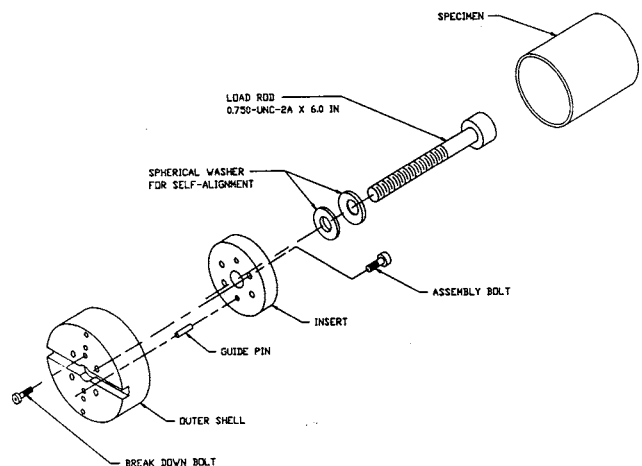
Assembly Drawing for Tension Fixture and Specimen
